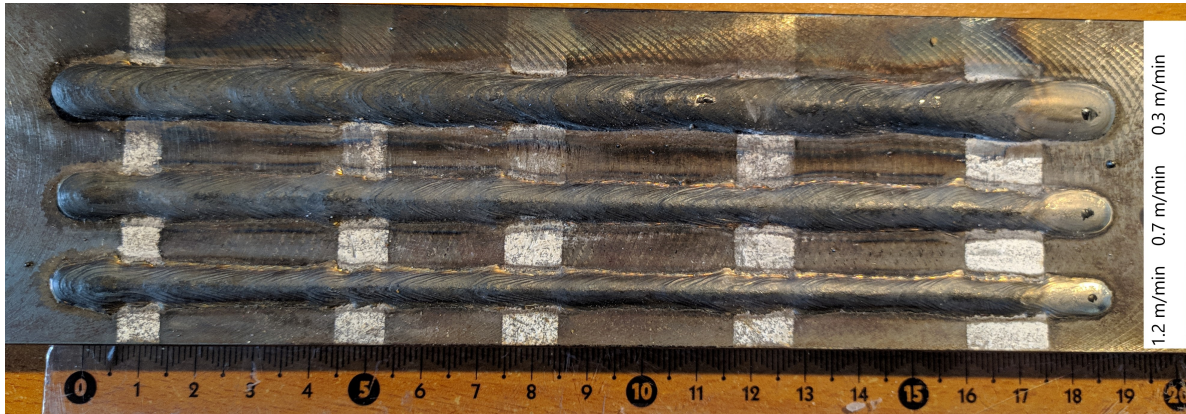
180 mm welds of different travel speeds printed on the ceramic pattern for anomaly detection with welding current of 160 A and welding voltage of 18 V
